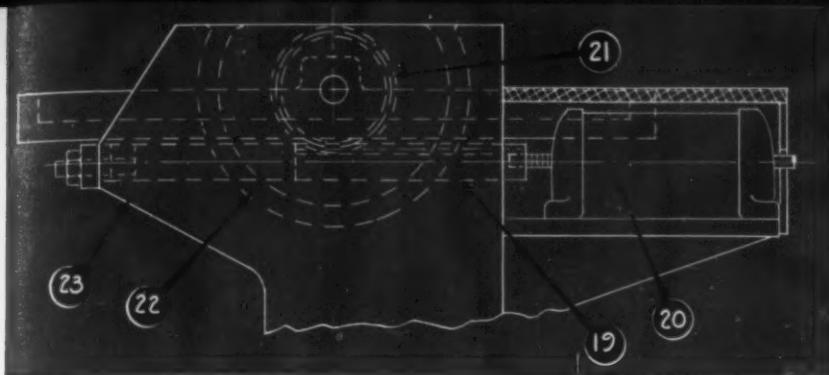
Details of the mold turning mechanism used on the single-station SU-1 machine. The sand hopper remains clamped to the pattern during rollover.
